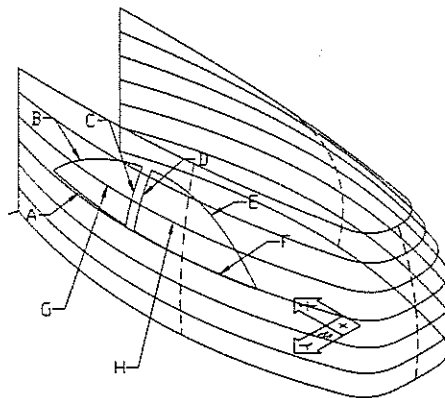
Trimmed edges copied, copied side surface untrimmed
